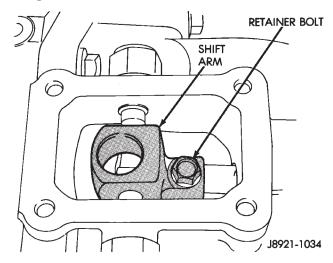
Shift Arm Retainer Bolt Removal/Installation
